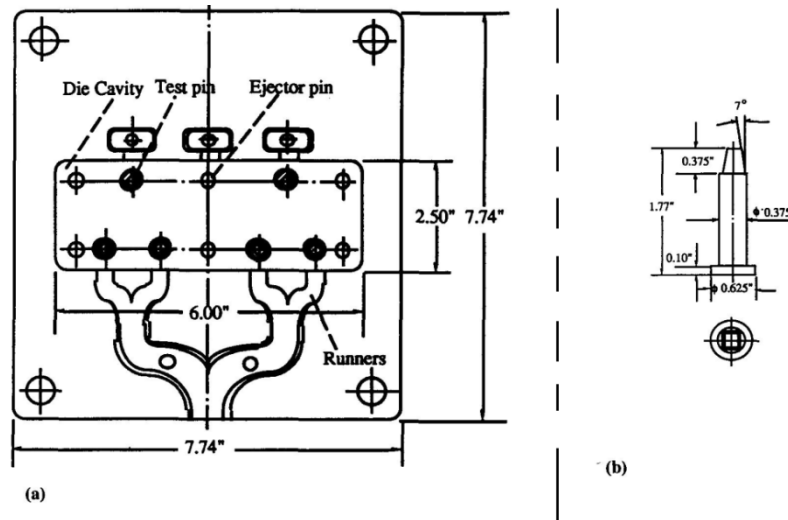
Dimensioned drawing of the multiple pin die [19].
